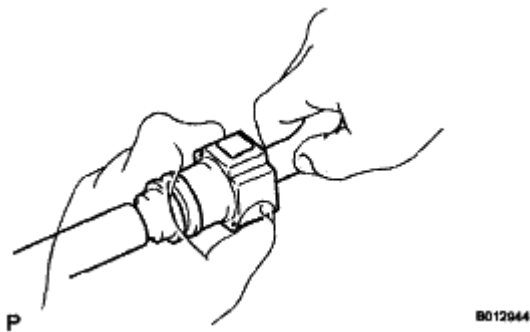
Pushing In Fuel Tube Connector To Fuel Pipe
